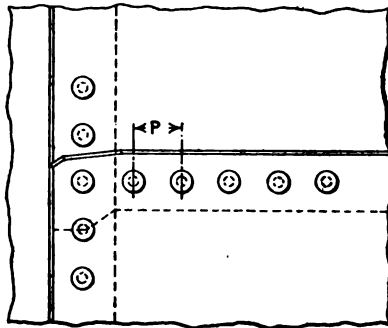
EXAMPLE OF LAP JOINT, LONGITUDINAL OR CIRCUMFERENTIAL, SINGLE-RIVETED
